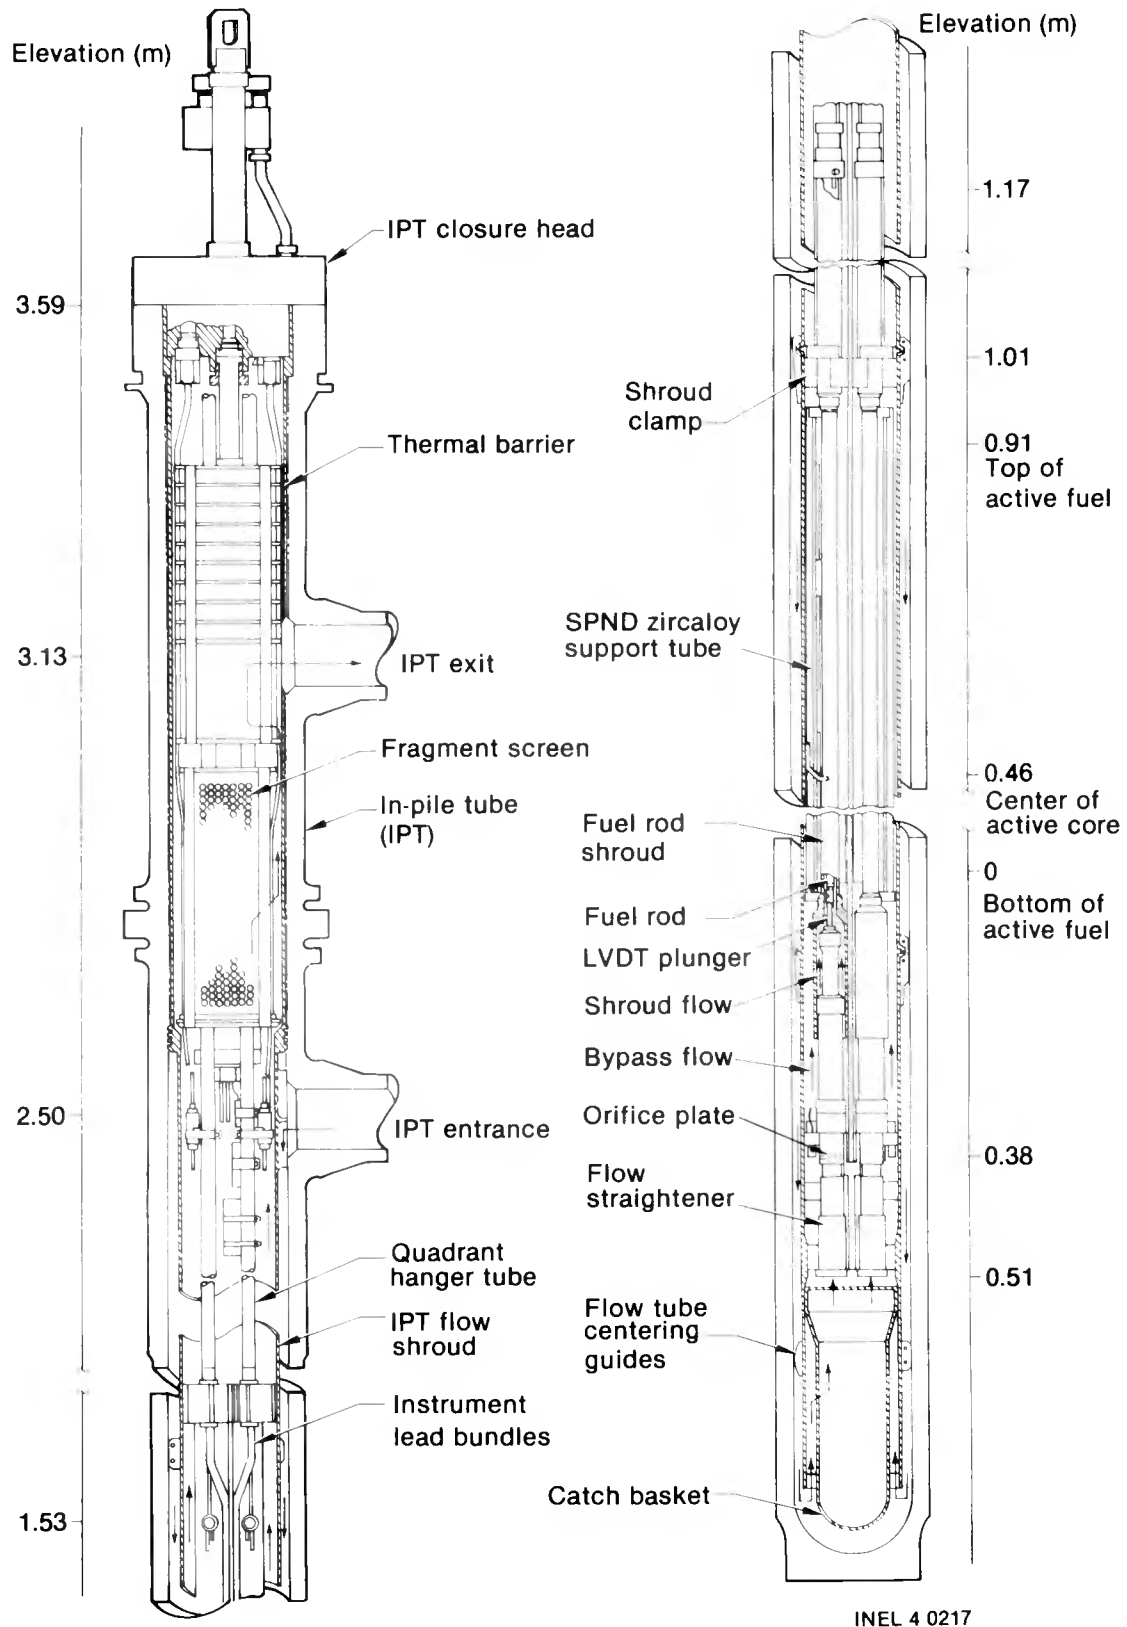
Axial cross section of RIA 1-1 test train assembly.
